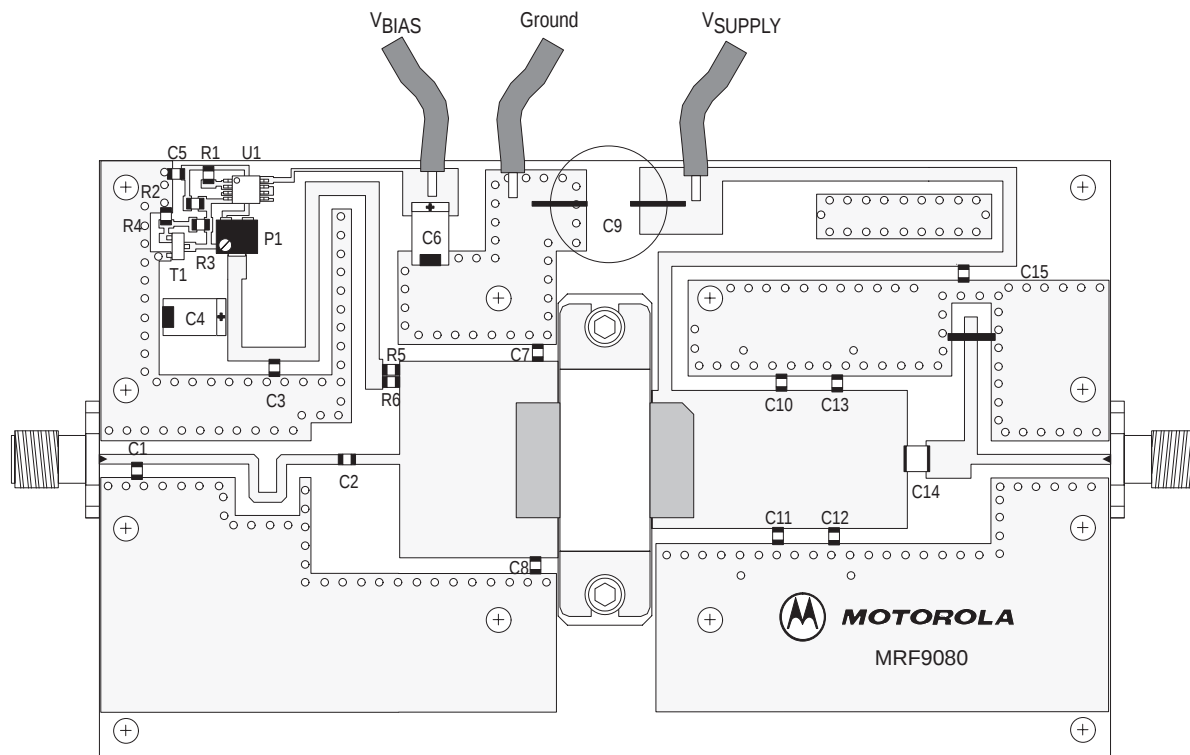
Broadband GSM 900 Optimized Demo Board Component Layout
